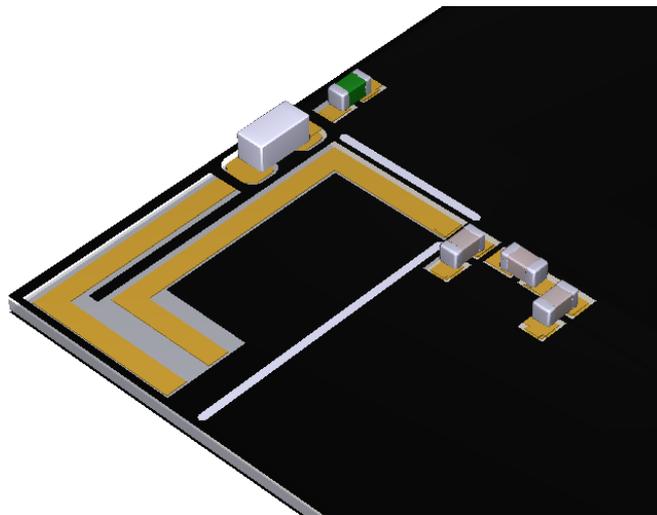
Isometric view of the AC10300-01 placement on the host PCB
